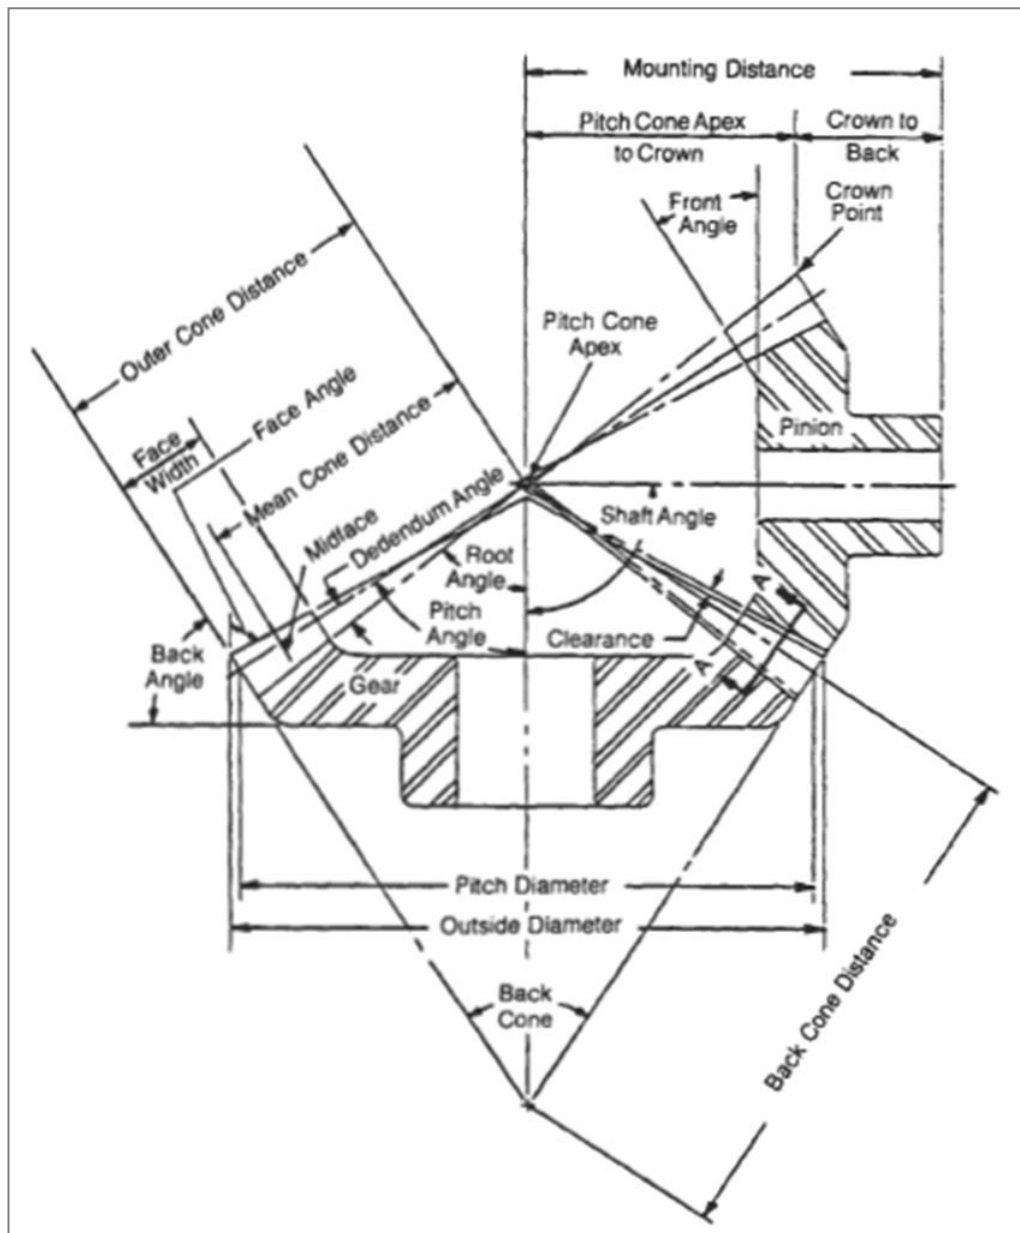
Bevel gears geometry (Bloch & Geitner, 1996).
